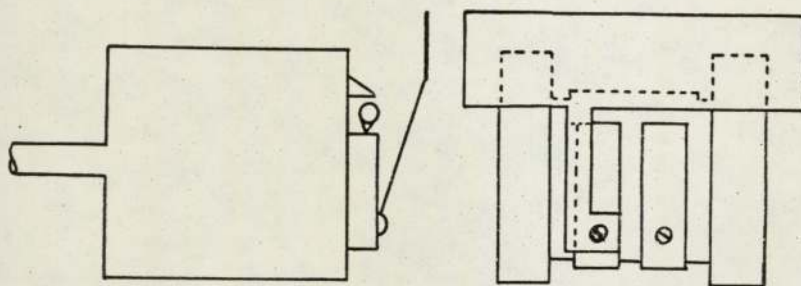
OVERSPRAY SHIELD; POSITION IN THE E-GUN.
